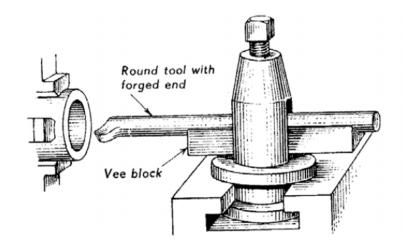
(a) Boring tool mounted in the tool post in centre lathe.
